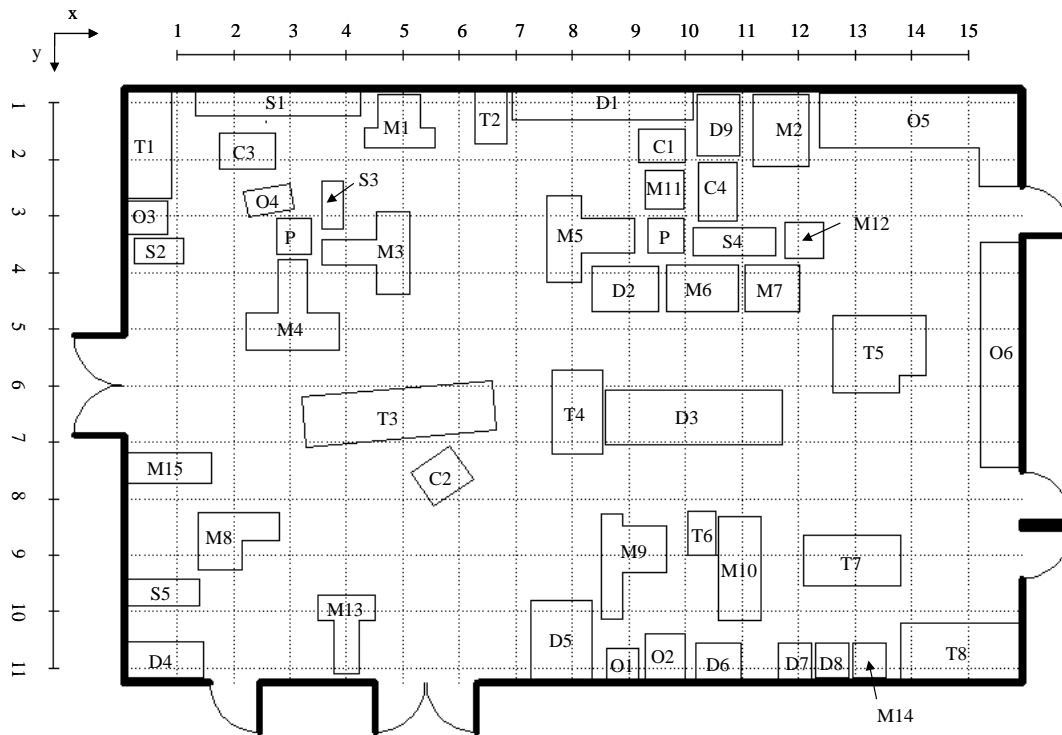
Layout of machine shop and grid division (T: Table, C: Cart, M: Machine, D: Drawer, cabinet, chest, or roll-away, S: Shelf, P: Pillar, and O: Others)
